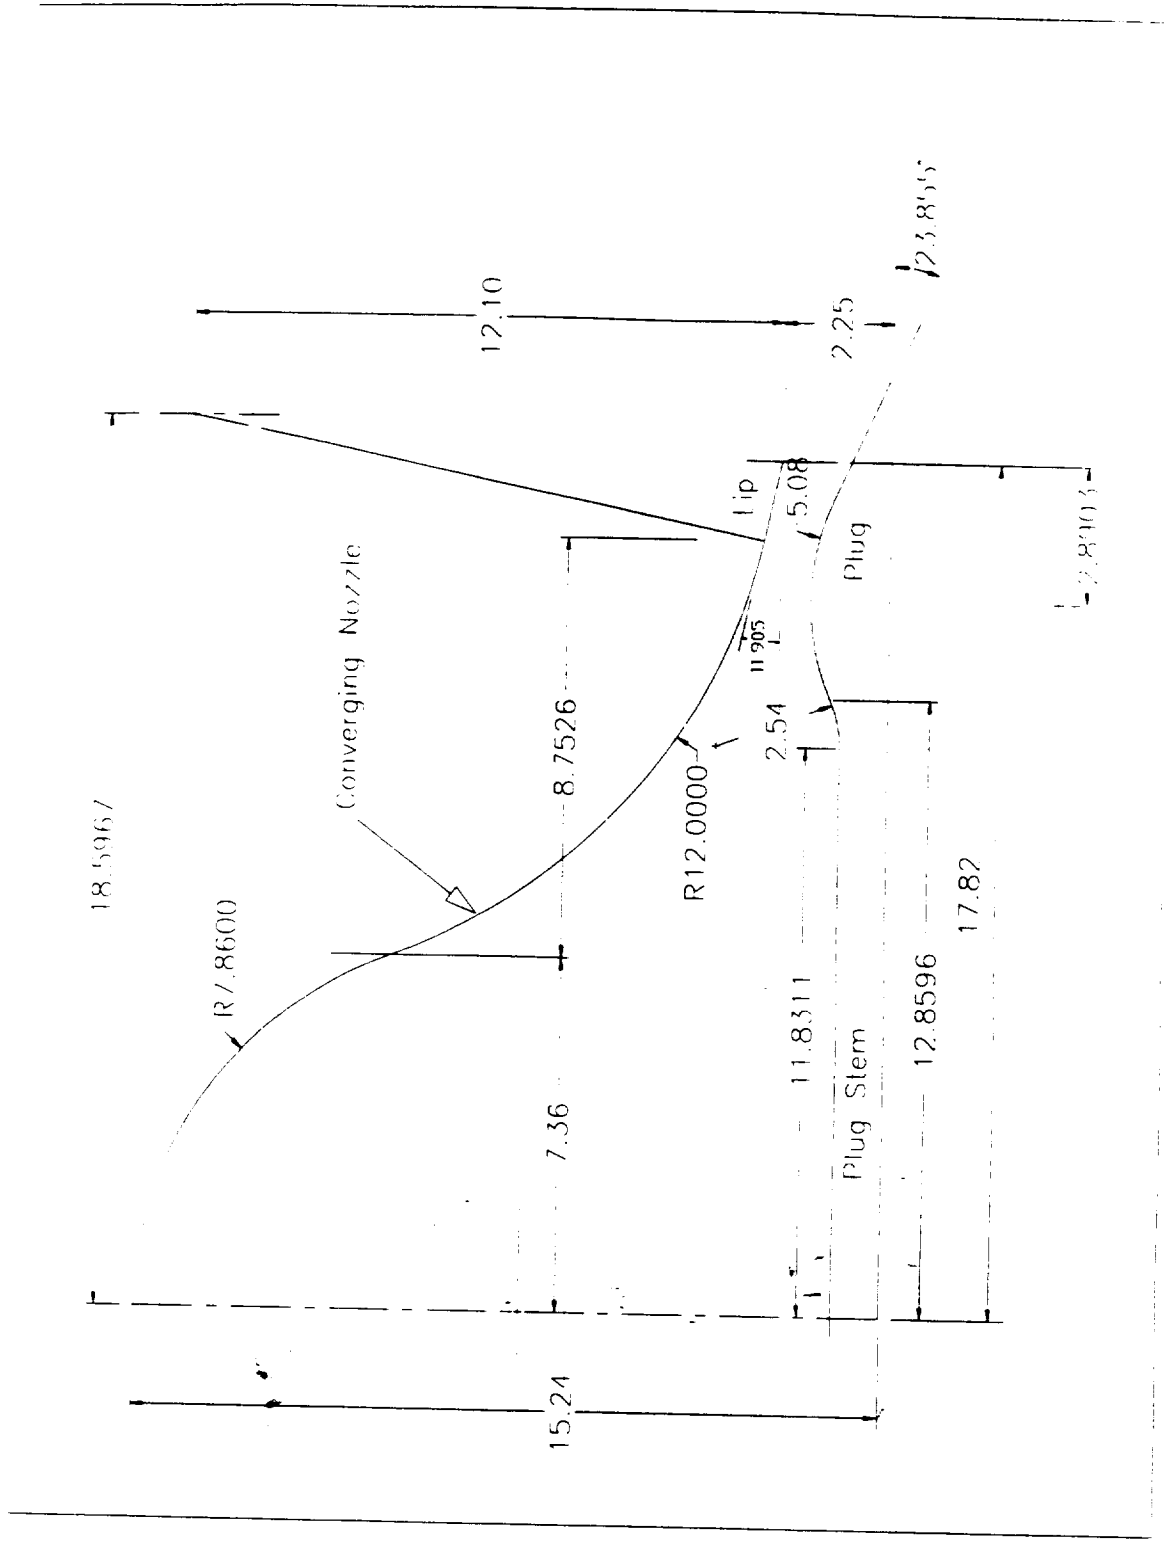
Fig. A Profile of the test converging nozzle plug (plug) (mm)
